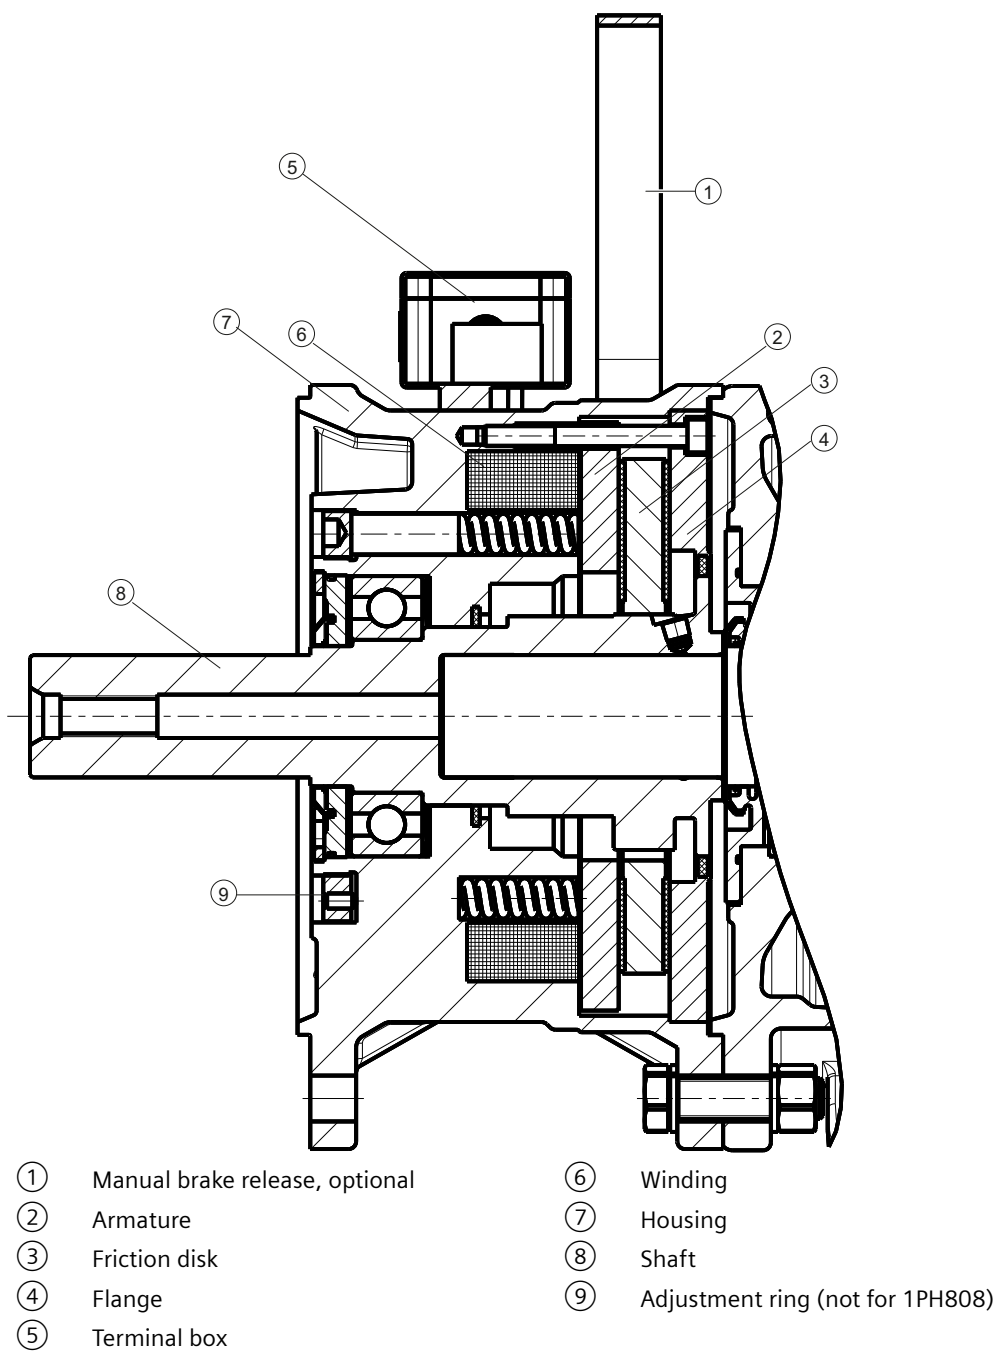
Single-disk spring-operated brake module 77 500...B15
